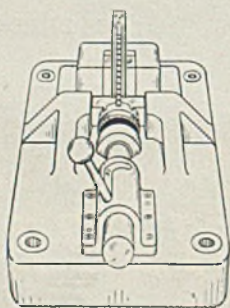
Fixture for broaching slots in special nut which is placed on short spindle and locked in position for each pass by bar and lever. Three passes are required to slot each nut
